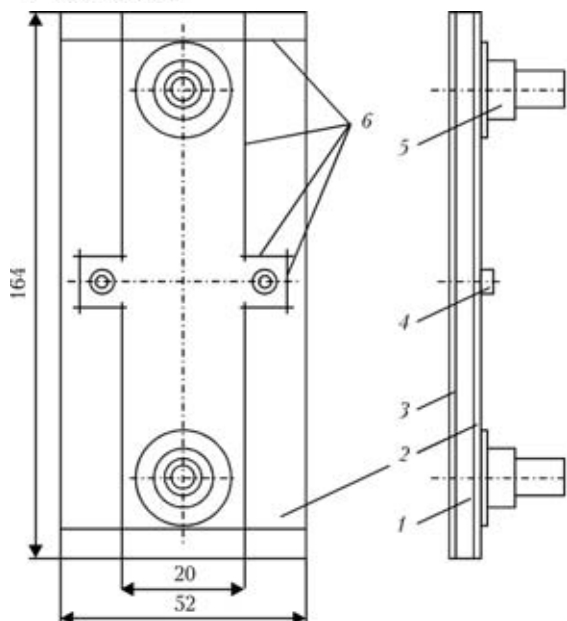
Scheme of measuring chamber of magnetic pneumatic gas analyzer of the Oxymat type: 1 – basement; 2 – upper plate; 3 – lower plate; 4 – nipple; 5 – exhaust pipe; 6 – overlap welds
